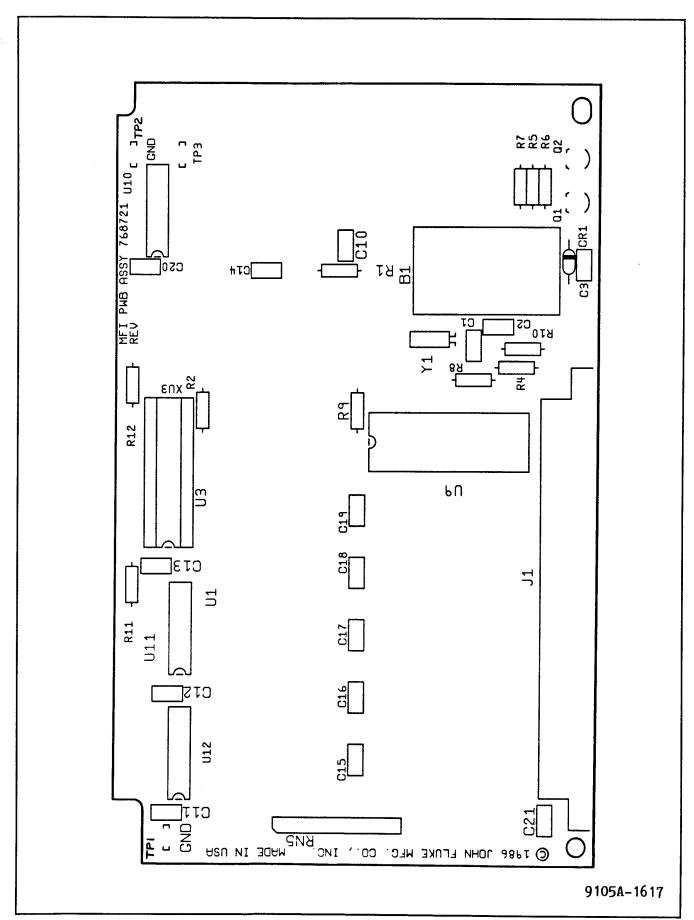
Option -008 Real-Time Clock PCA 5-57
